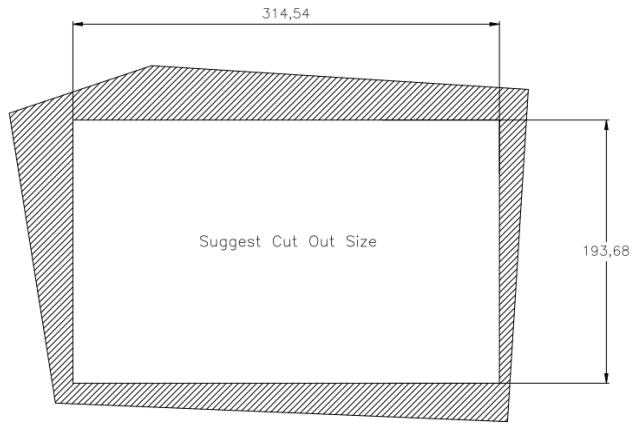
AURA-W133-RK3576 Panel Cutout Dimensions
